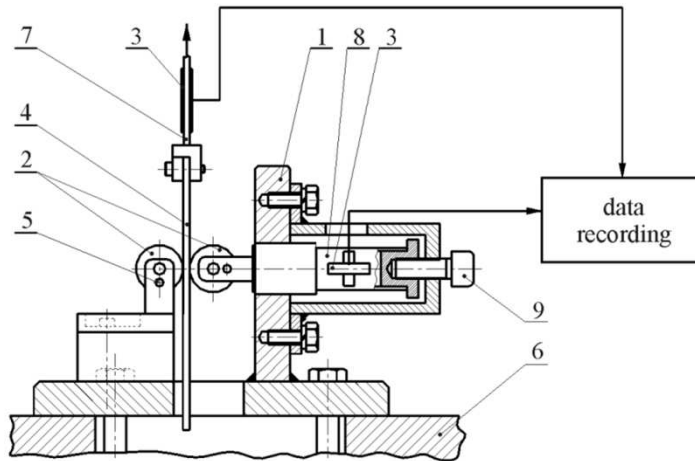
Scheme of measuring device: 1 – frame; 2 – working rolls; 3 – load cells; 4 – specimen; 5 – blocked pin; 6 – grip of testing machine; 7, 8 – tension members; 9 – set bolt.
